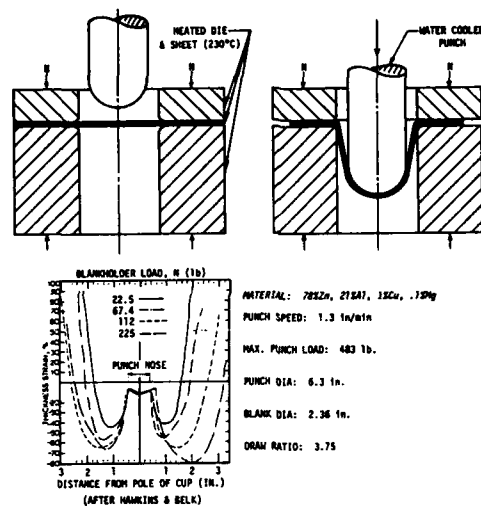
Sketch of the punch forming set-up for deep drawing a superplastic sheet. Also shown are the thinning profiles resulting from deep drawing with blank holder loads.
